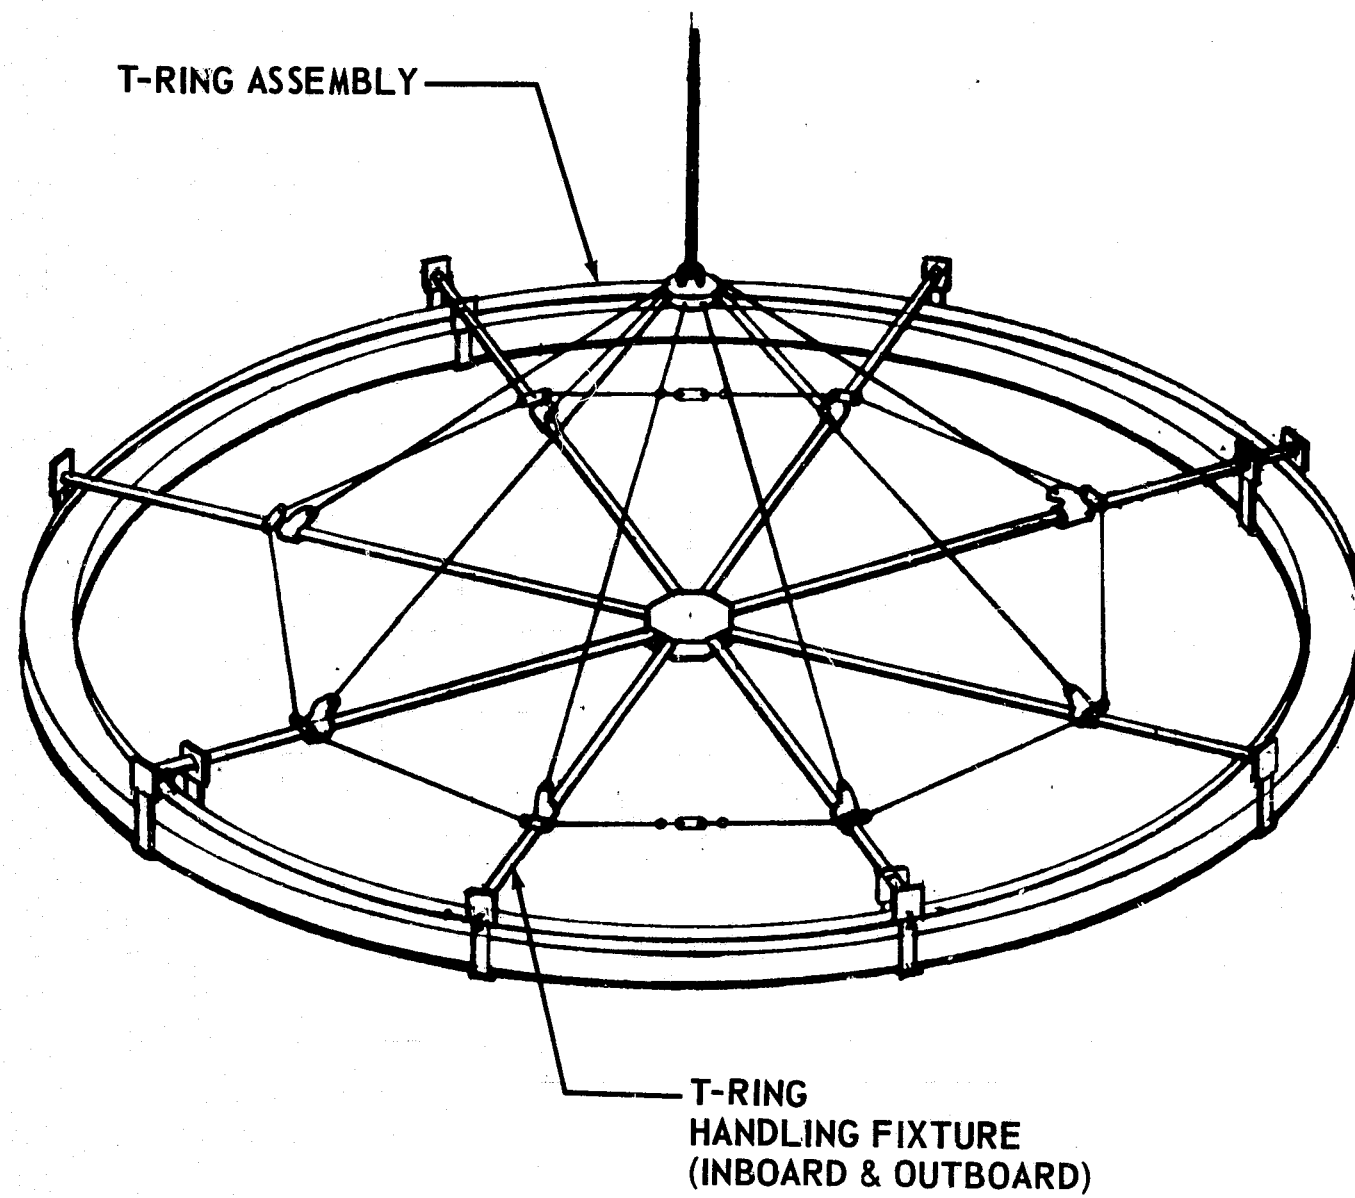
T-RING HANDLING TOOL
